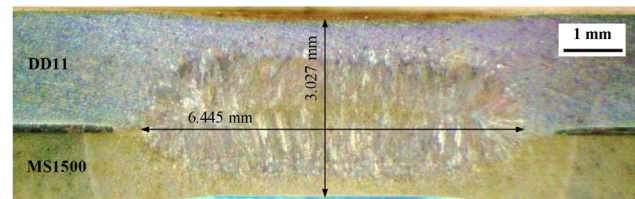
Cross-section view of the welded joint using double-pulse strategy with 8.6 kA and 8.4 kA currents.
